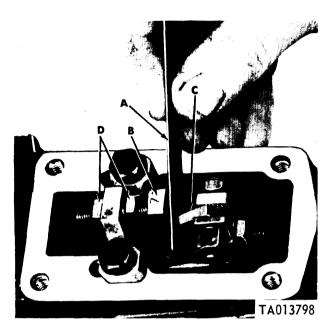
Checking stop plate and smoke limit cam clearance (code G pumps).
